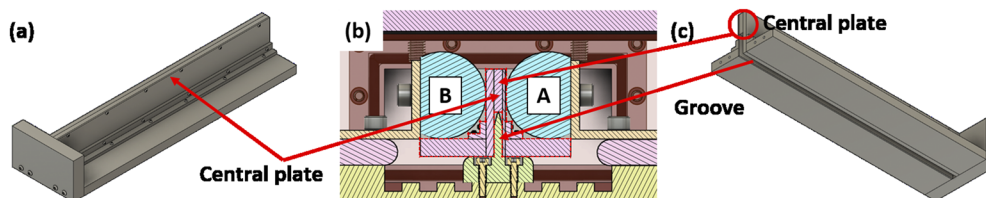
(a) The top view of the CAD drawing of the jig. (b) The CAD drawing of the jig being used to determine the positions of electrodes relative to each other. (c) The bottom view of the CAD drawing of the jig. The jig pointed out by the red-dashed line can be slid out through the side window. The width of the jig can be adjusted by replacing the central plate with different thicknesses. Courtesy of Ref. 18. Reprinted with permission from M.-C. Jheng, "Development of a 400 MW pulsed-power system," M.Sc. thesis, National Cheng Kung University, 2019.
